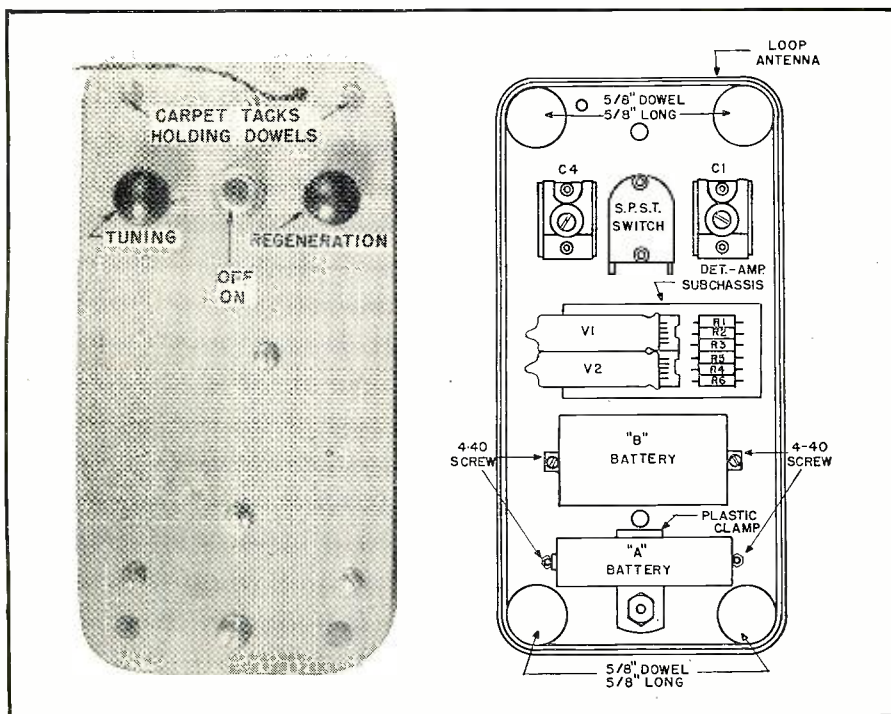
Front view of the receiver (left) showing location of the various controls. Mechanical drawing indicates how the various component parts should be placed.
